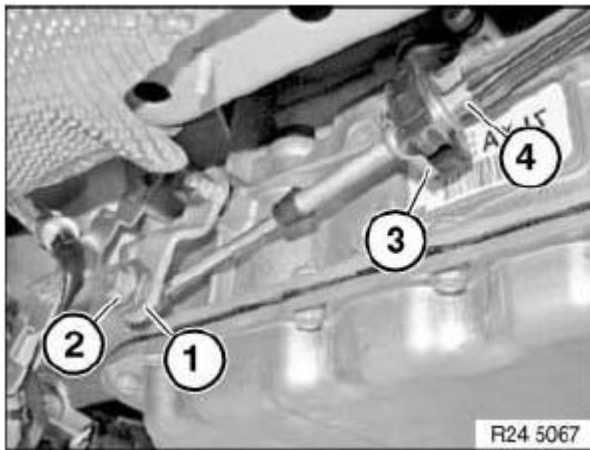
Identifying Clamping Sleeve, Retainer And Nut
